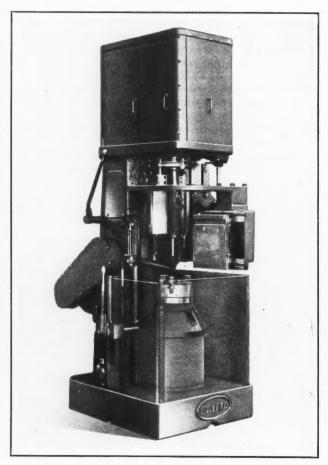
Bullard Single-spindle Vertical Automatic Chucking Machine
